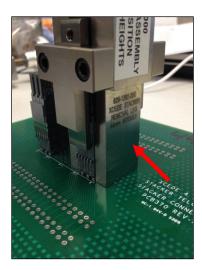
Photo shows extension blocks being used on either side of a single Stacker module.
